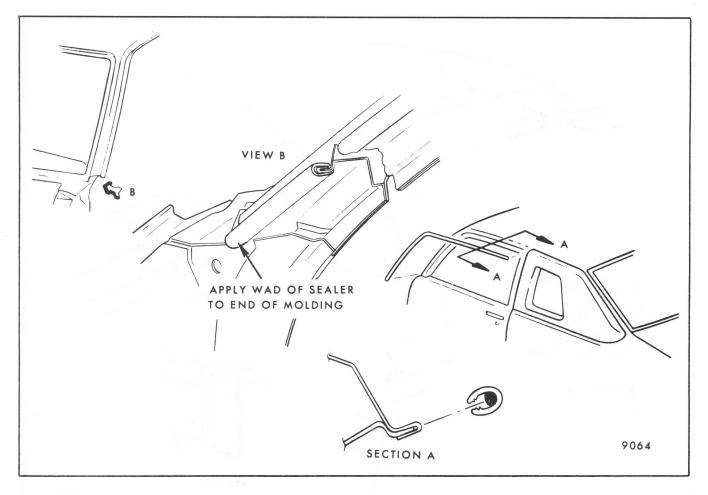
Roof Drip Scalp Molding "X" Shown "F and H" Similar
